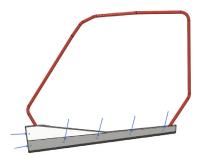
Fasten Vinyl to Front Upper Door Frames using a 3/8" Socket and 7/16" Wrench in the locations shown
